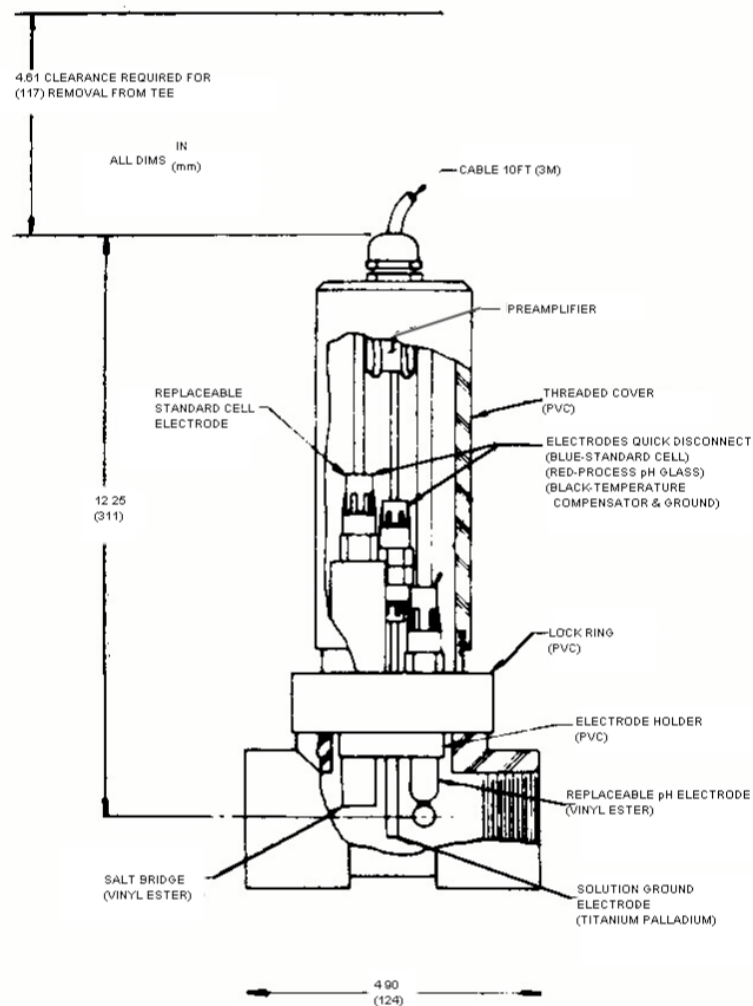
Flow-Thru Sensor Assembly Details
